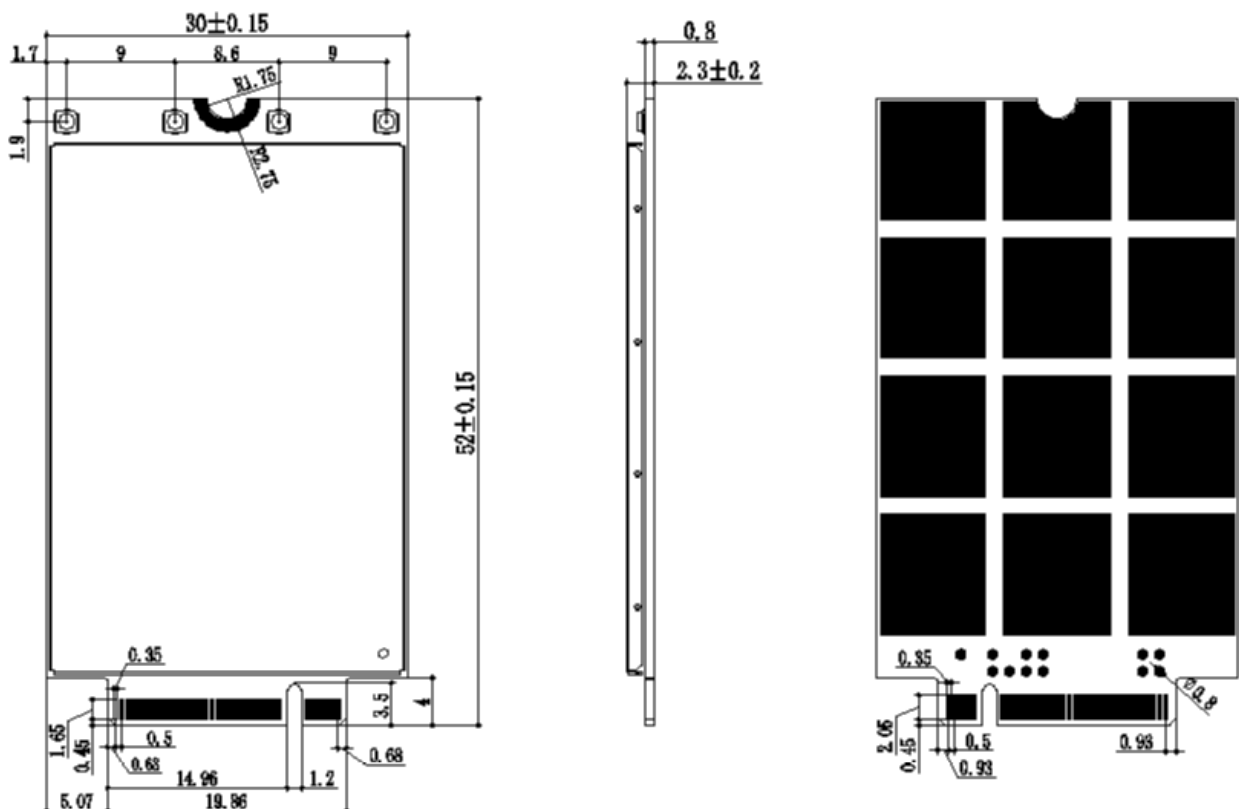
Mechanical Dimensions of RM500Q-GL (Unit: mm)
